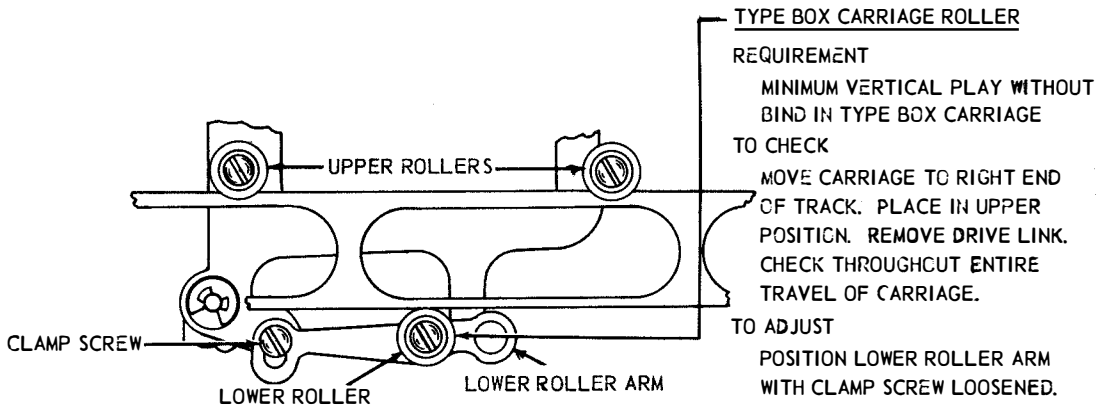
TYPING UNIT, PRINTING AND TYPE BOX CARRIAGE
